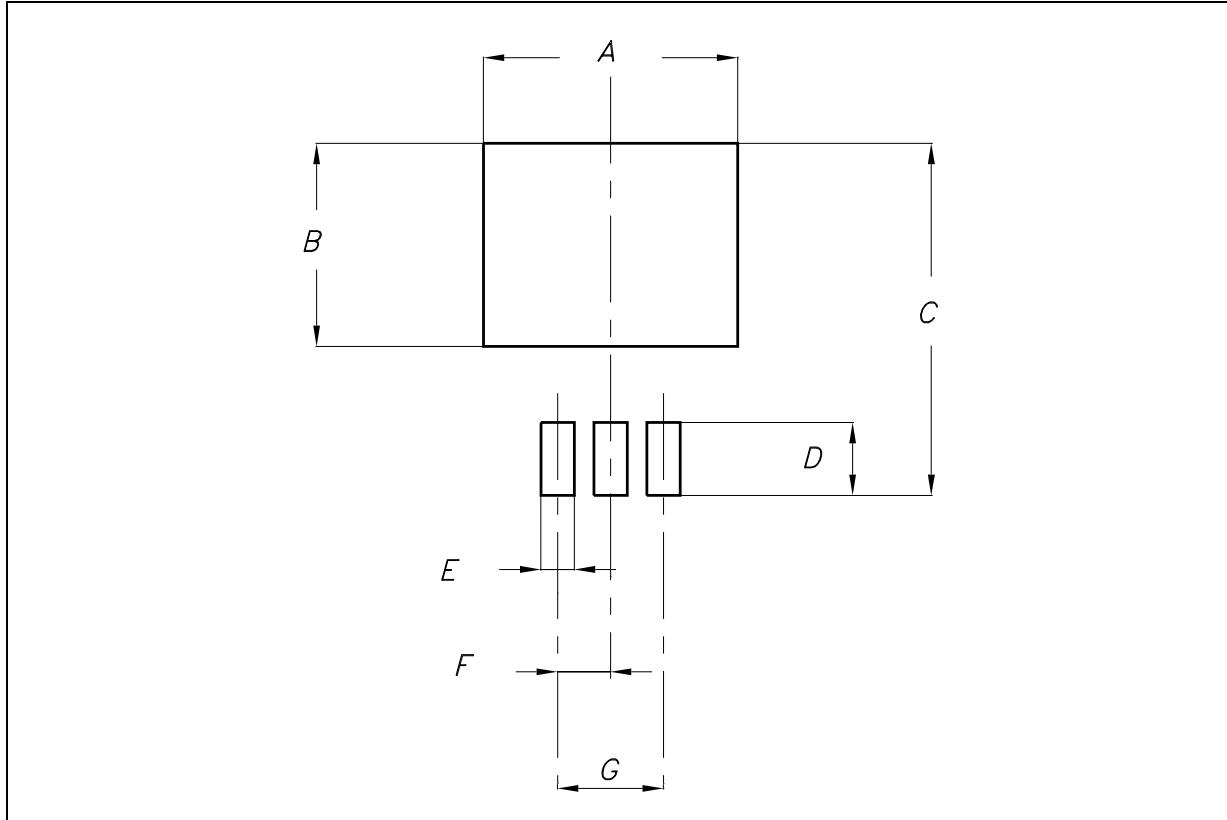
Drawing dimension D<sup>2</sup>PAK/A (type STD-ST)
